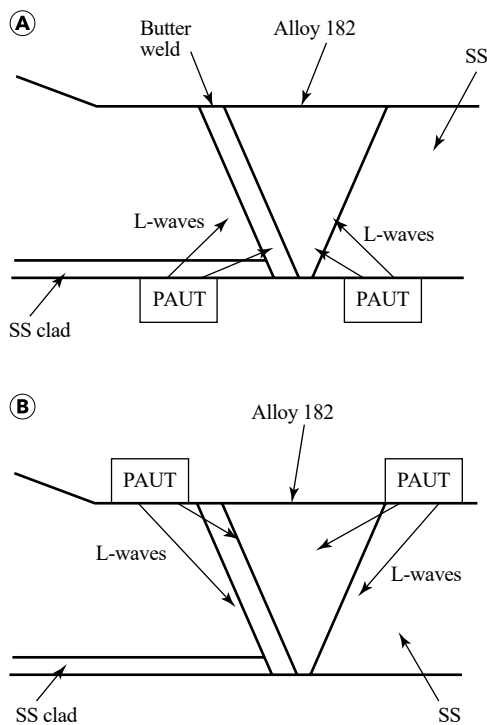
PAUT of dissimilar metal welds using refracted longitudinal waves: (a) from ID surface; (b) from OD surface.
